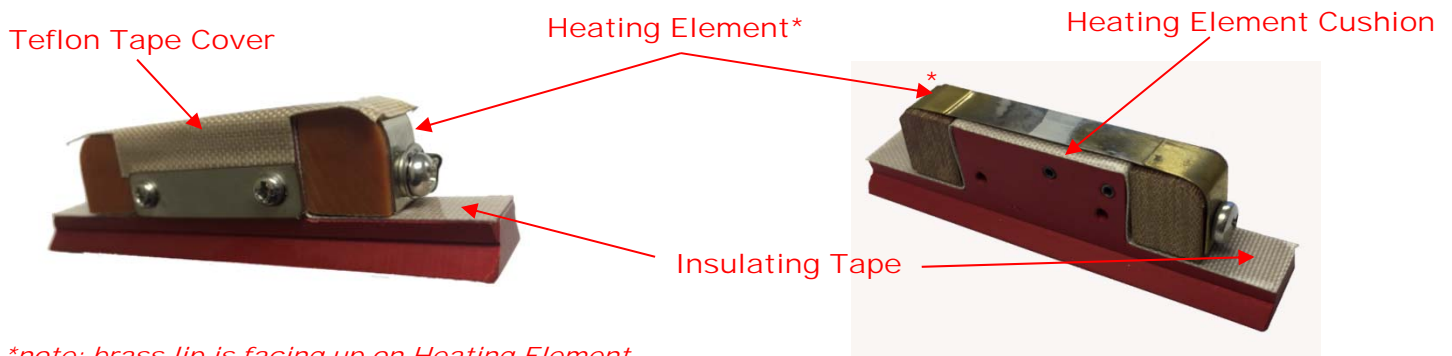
Complete Heating Block Assembly (Part #: ZCP 9730)
